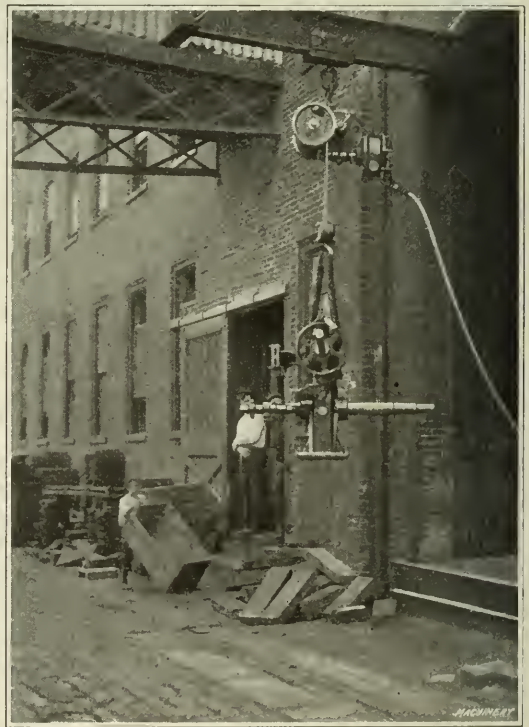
Where heavy materials come to a plant by railroad or motor truck and a trolley system is used for carrying them to various departments in the plant, it will be found good practice to have a beam extending out over the railroad or roadway, with an extension of the trolley rail supported on this beam. This illustration shows such an arrangement, with an Ingersoll-Rand "Imperial" hoist and trolley
